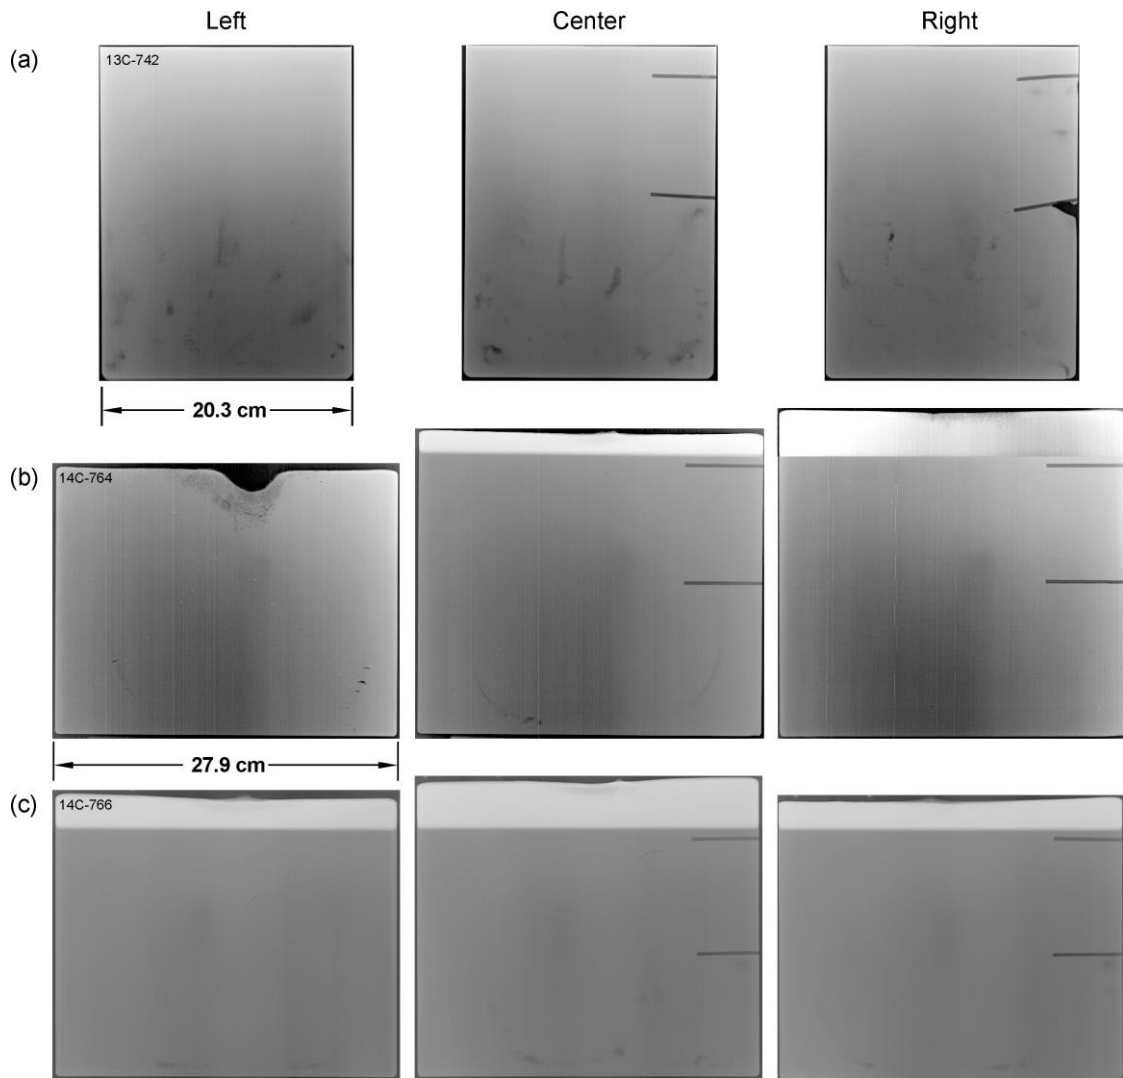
Radiographic results of the three castings; (a) initial mold design, (b) redesigned mold with linear distributor, and (c) redesigned mold with axisymmetric distributor.
